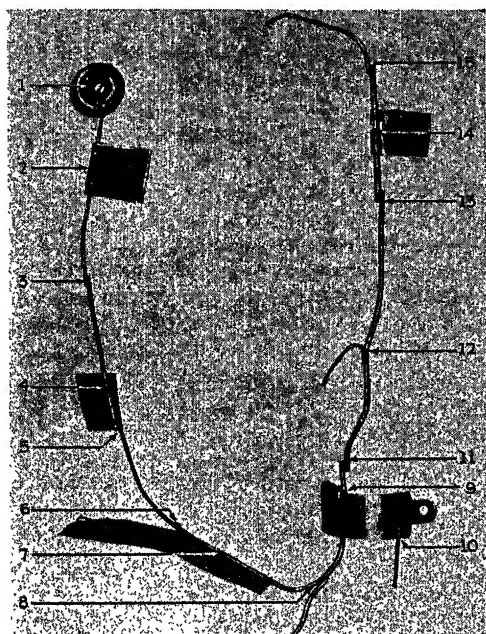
RESISTANCE WELDS OF VARIOUS METALS MADE WITH THYATRON CONTROLLED WELDER
